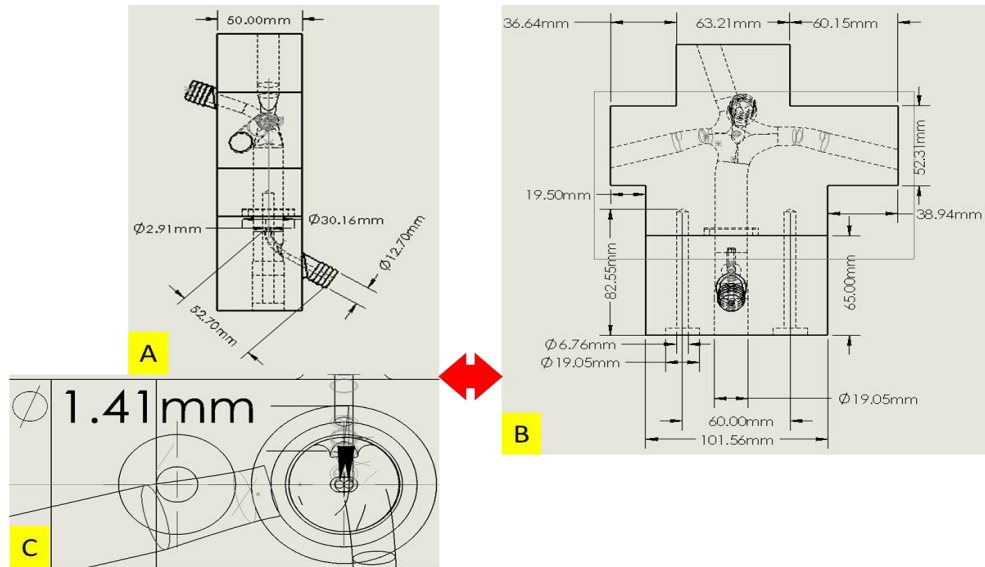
A Side view representing lip section and IJS dimension B. TCPC front view C. Interior view of the bottom block with two circular profiles of the IJS nozzle
